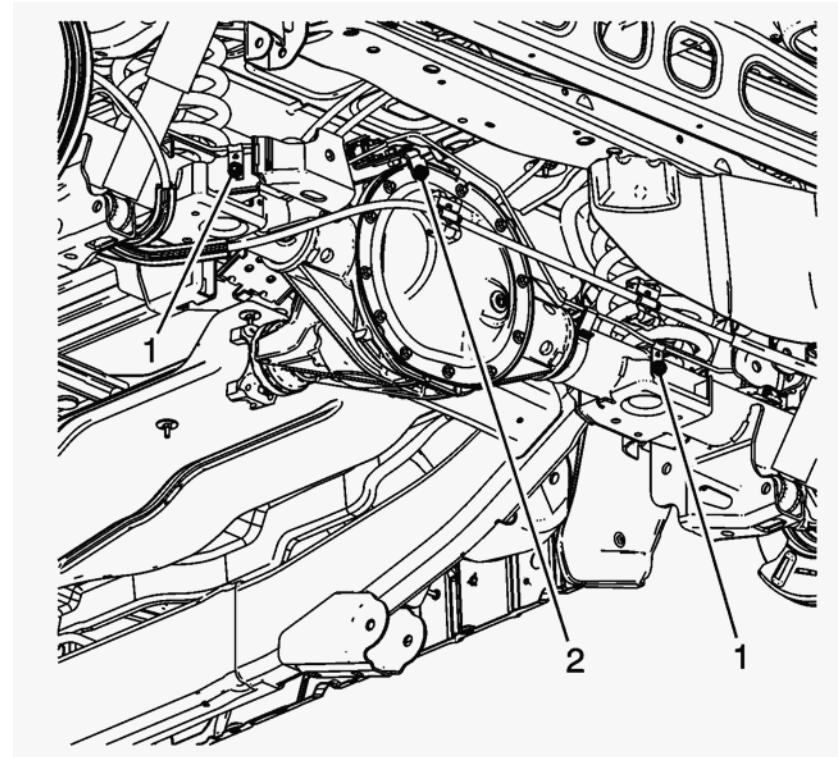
Rear Brake Pipe Retaining Bracket Bolt
